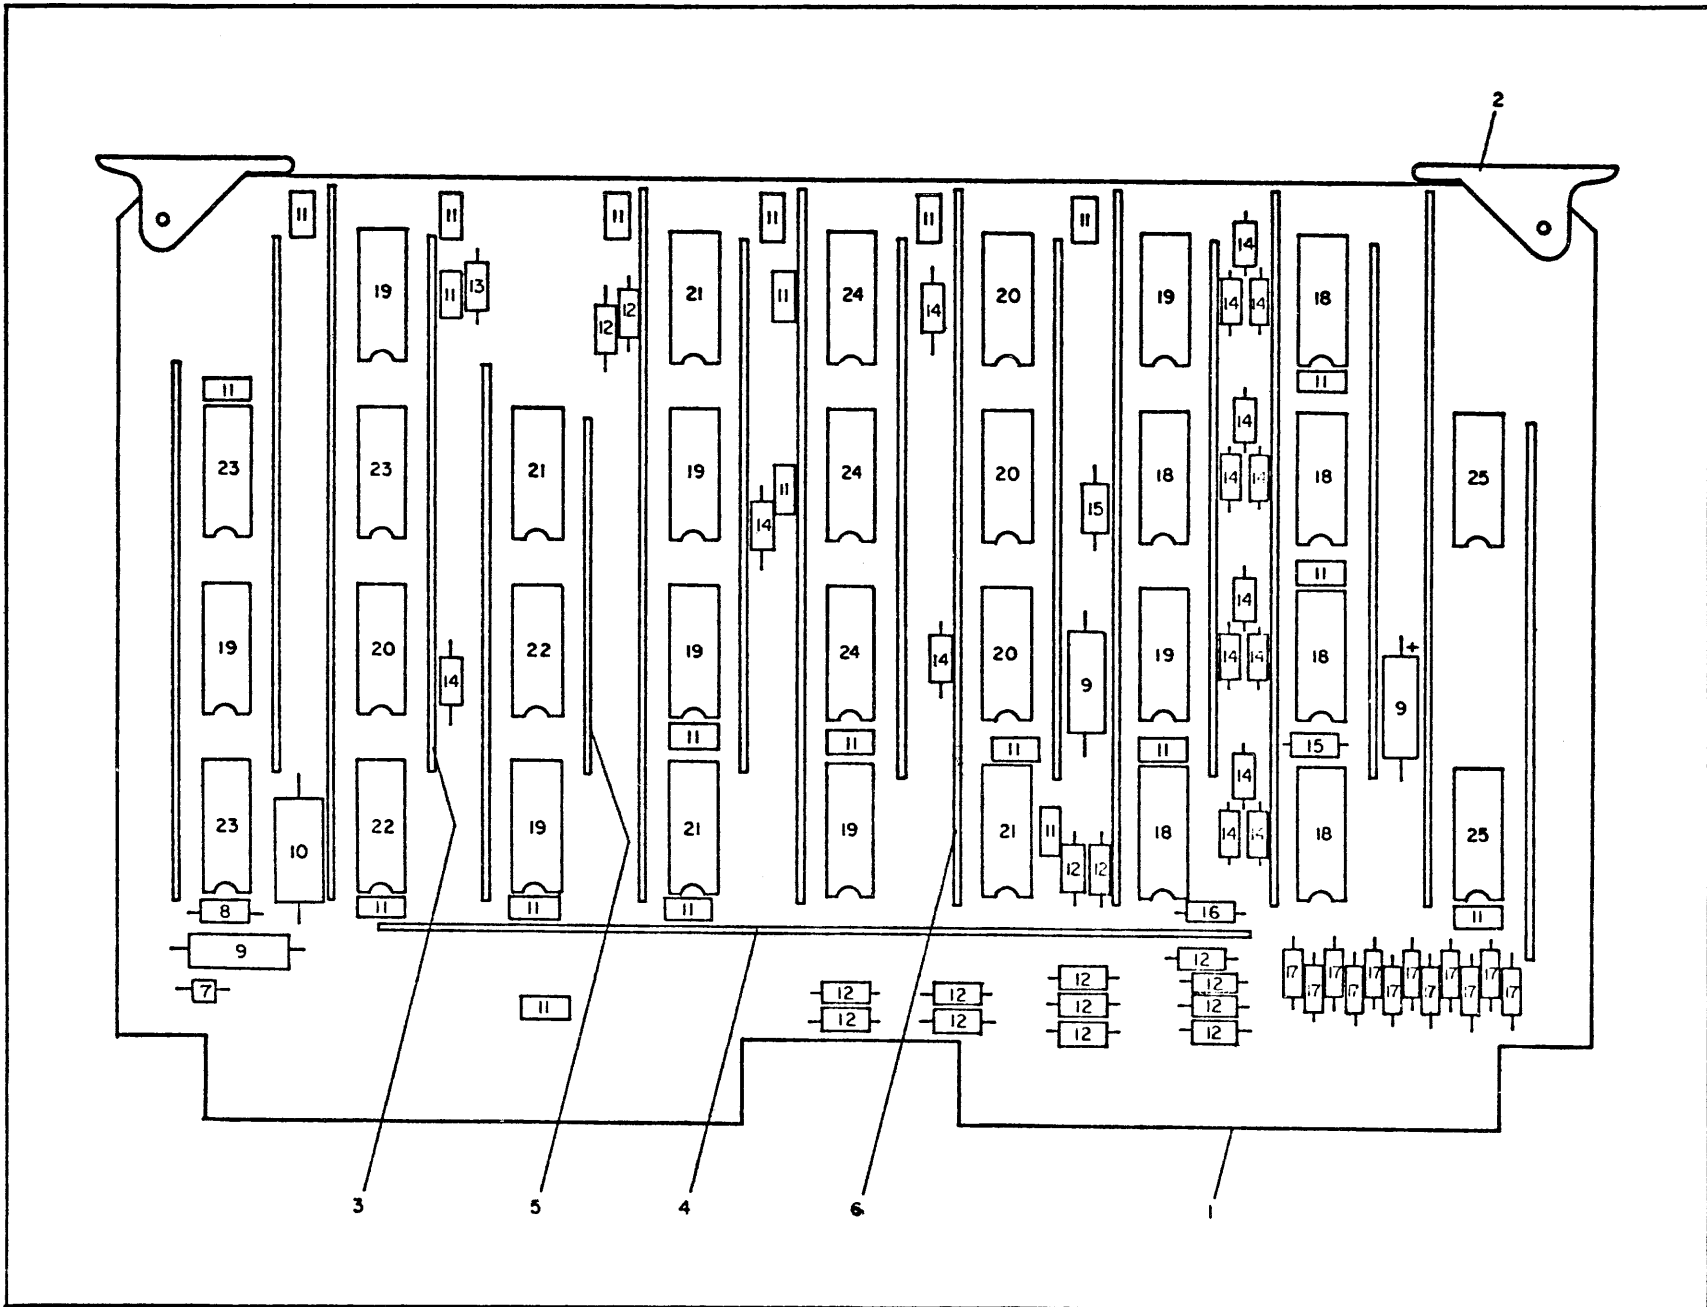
PC ASSEMBLY - CONTROL CARD
